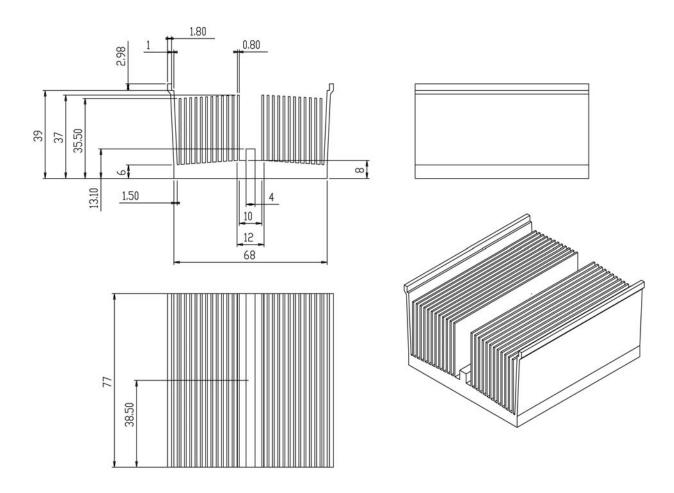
Example of a Low-Cost Heatsink Using Aluminum Extrusion Technology
